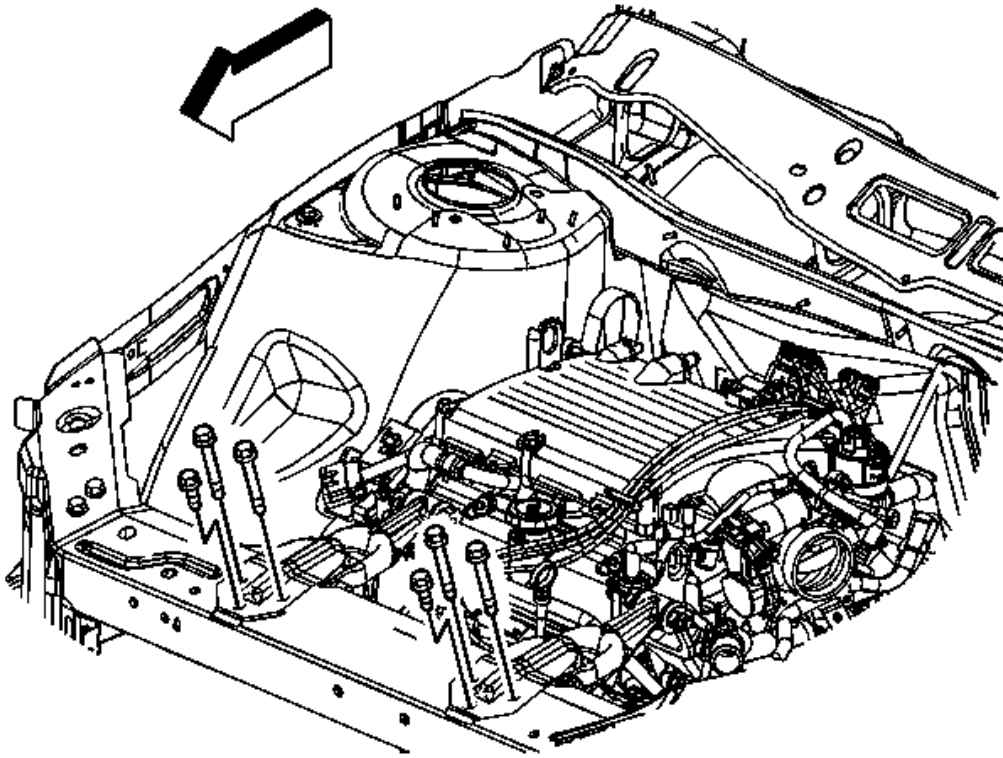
View Of Engine Mount Strut & Radiator Support Bolts
